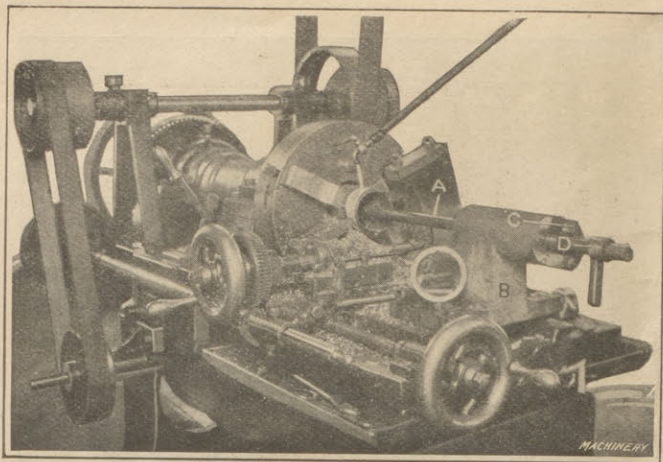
Cutting off Excess Length of Shrapnel Forging in a Hurlbut-Rogers Cutting-off Machine
